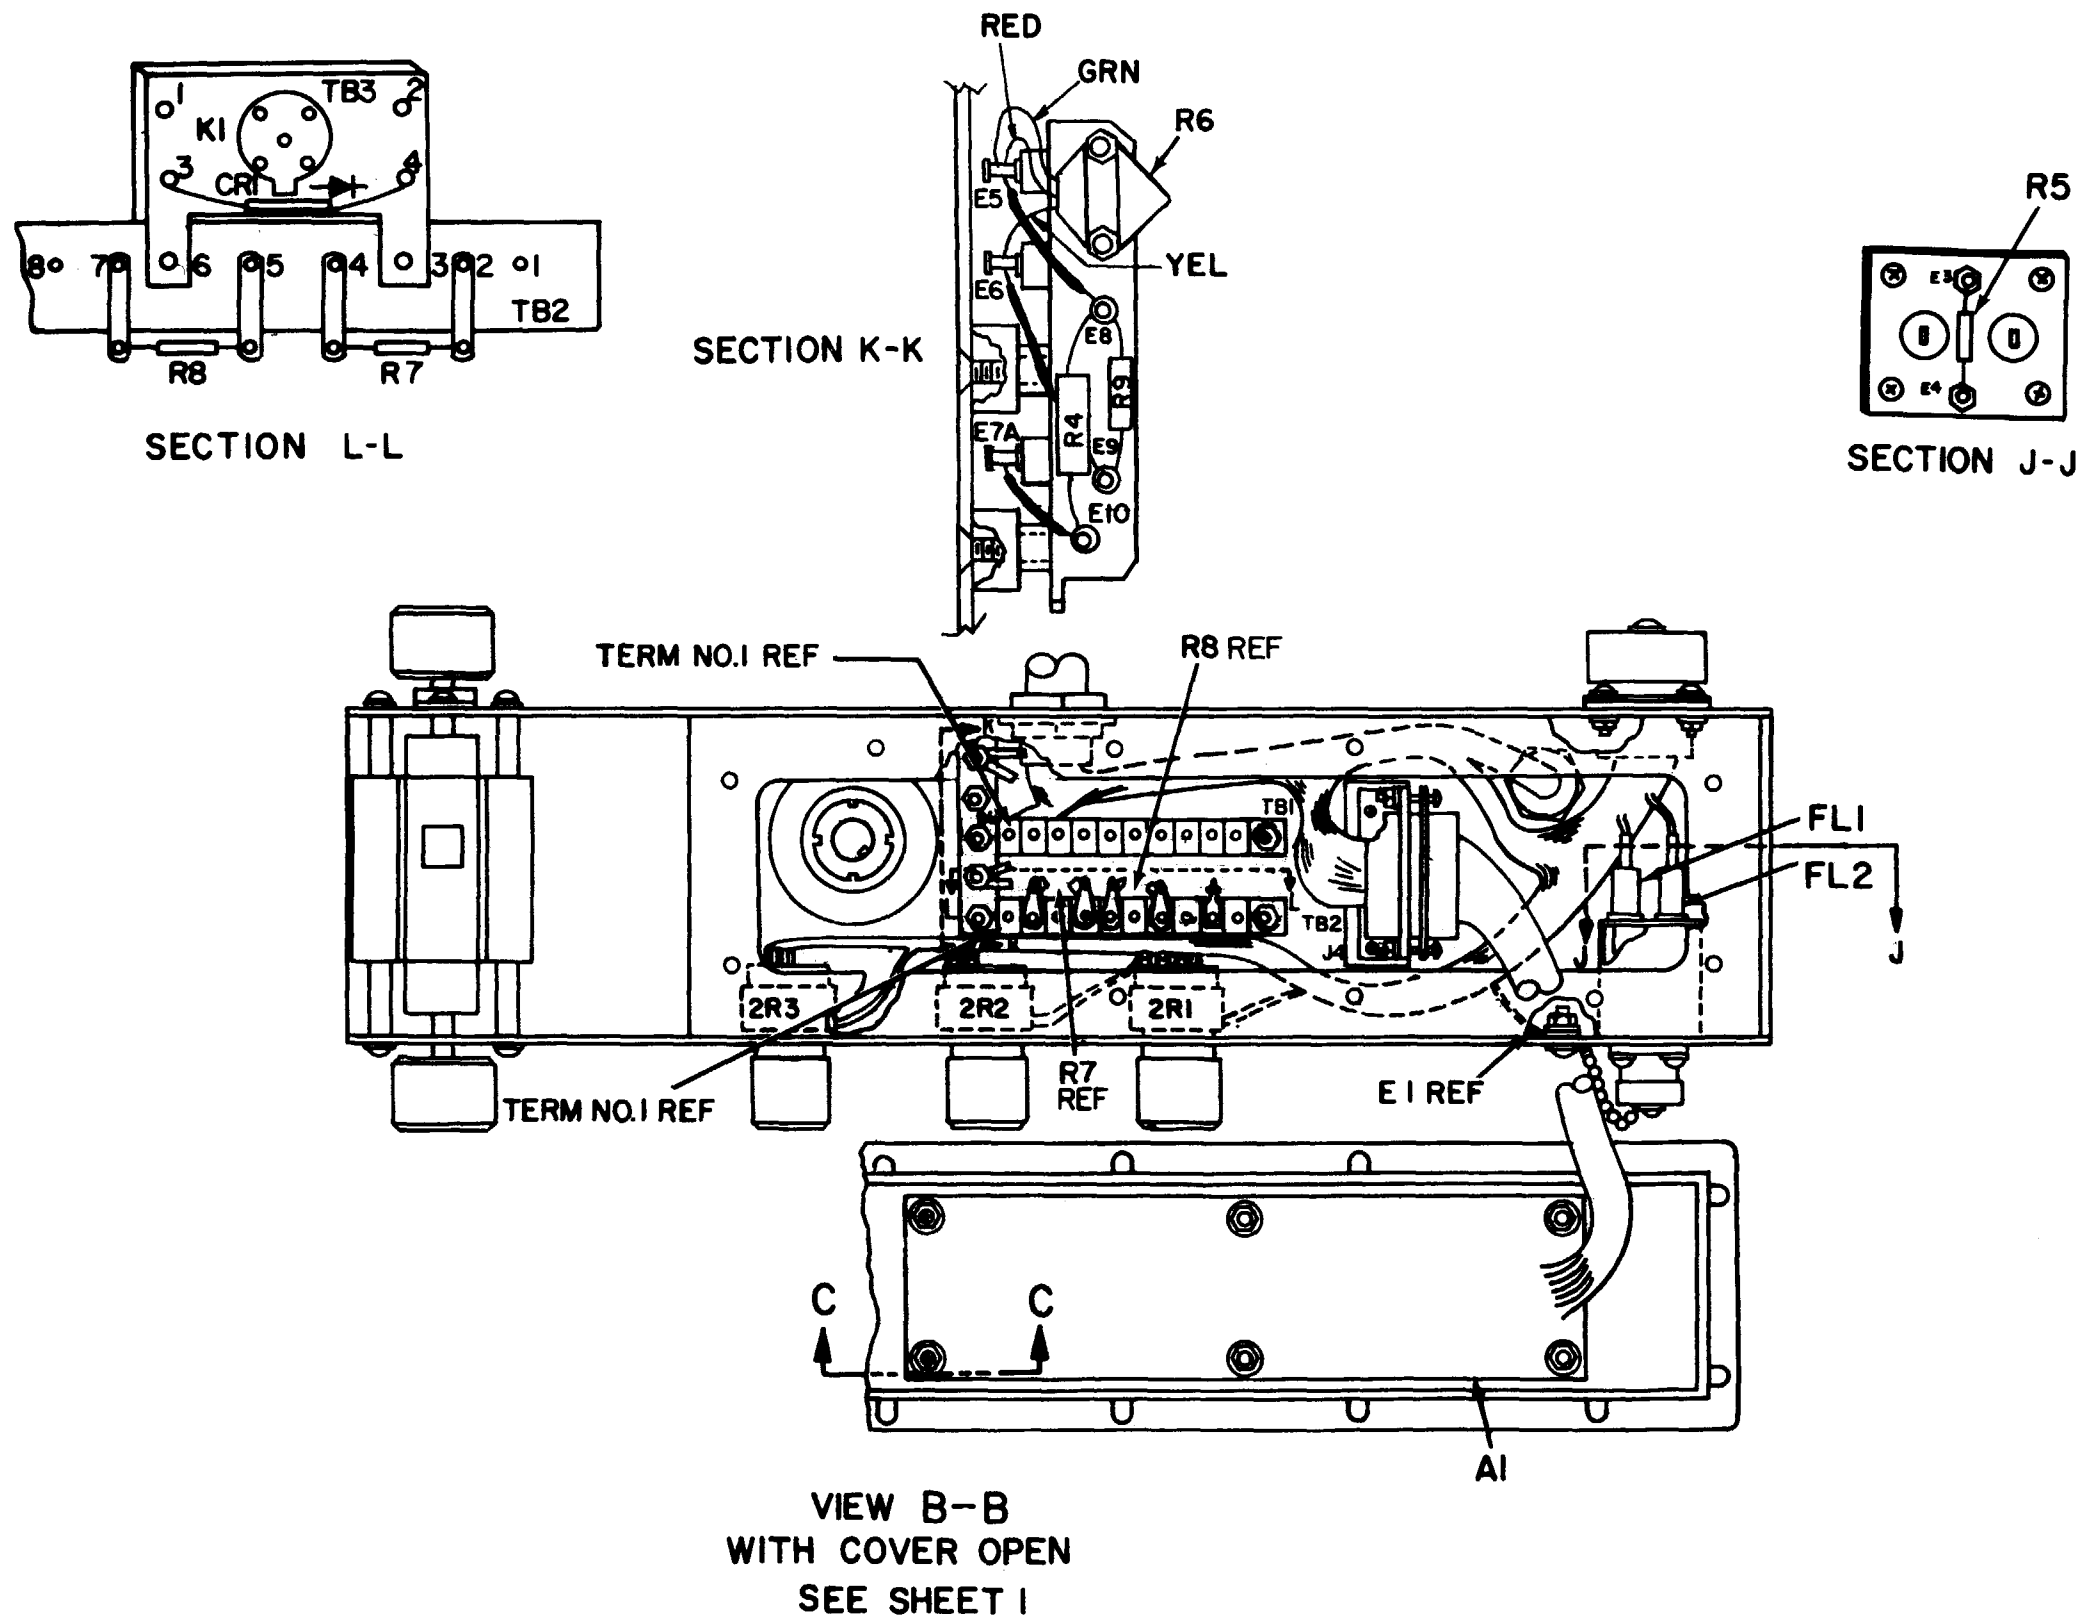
Optical alignment, fixture, parts location diagram (sheet 1 of 2).
